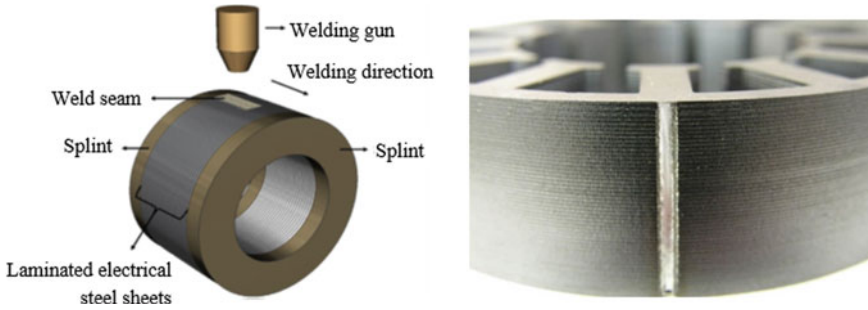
Schematic description of laser stator welding. Weld gun in the picture gives the impression it is gas metal arc welding which is used [104]
